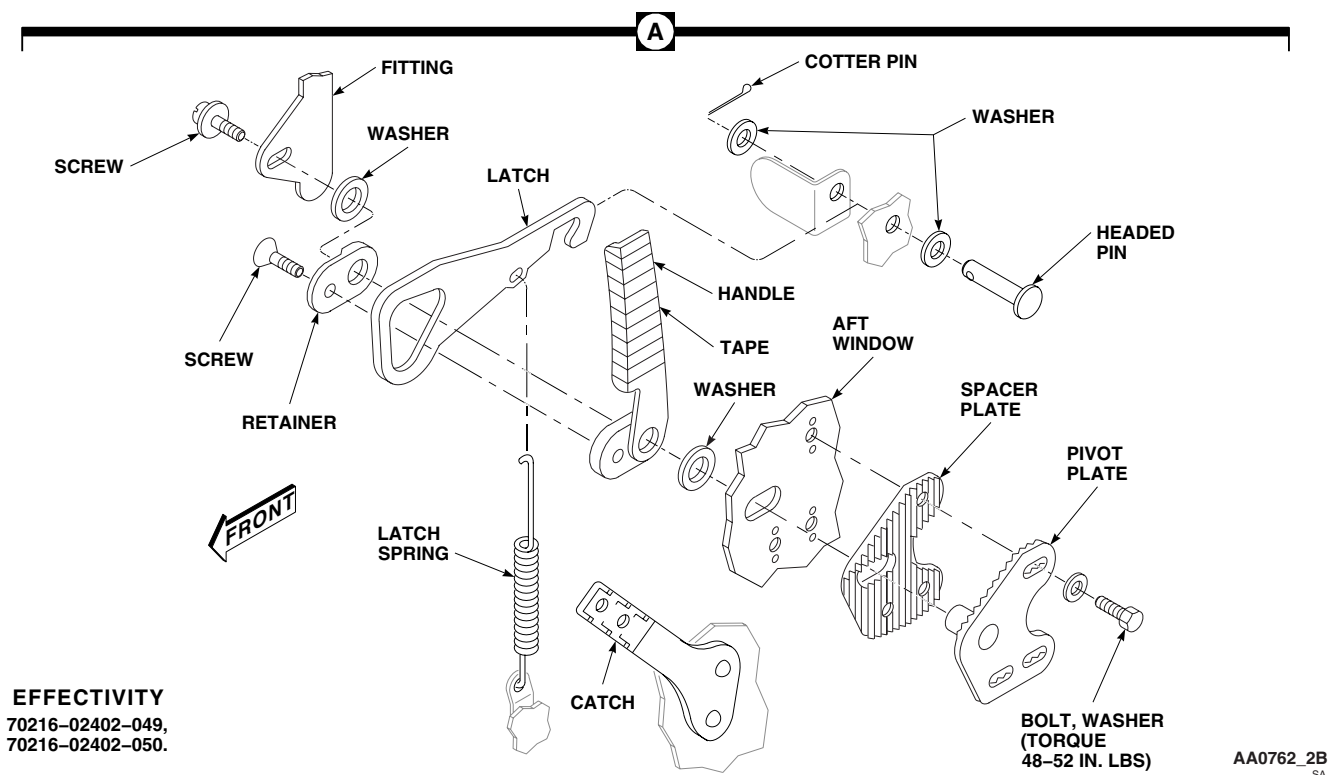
Replace Gunner's Window Latch Assembly. (Sheet 2 of 2)
